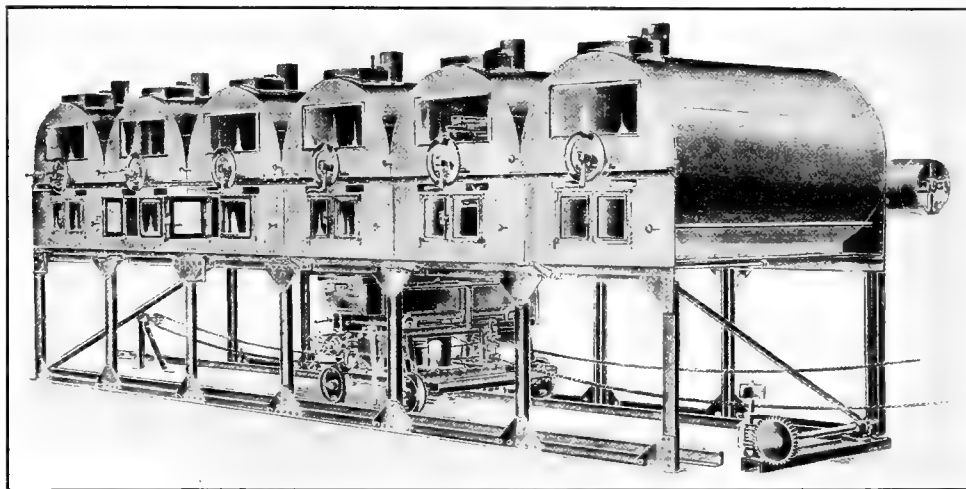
MACHINES FOR MAKING DIPPED GOODS WITH MOVABLE SOLUTION CAR.
